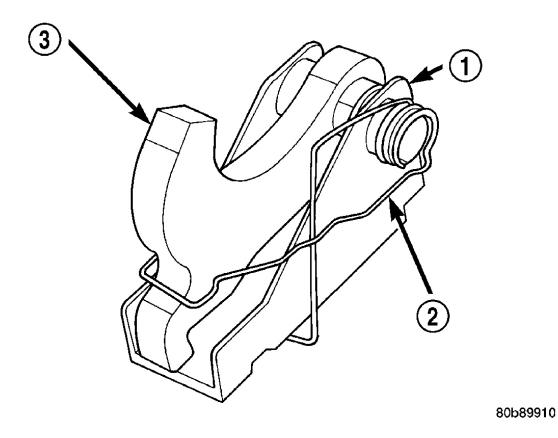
Assembled Guide Bracket Courtesy of CHRYSLER LLC
